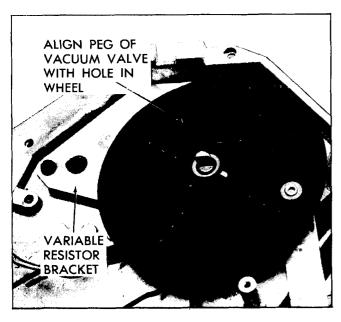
B-65 Aligning Vacuum Valve With Track In Programmer Wheel
